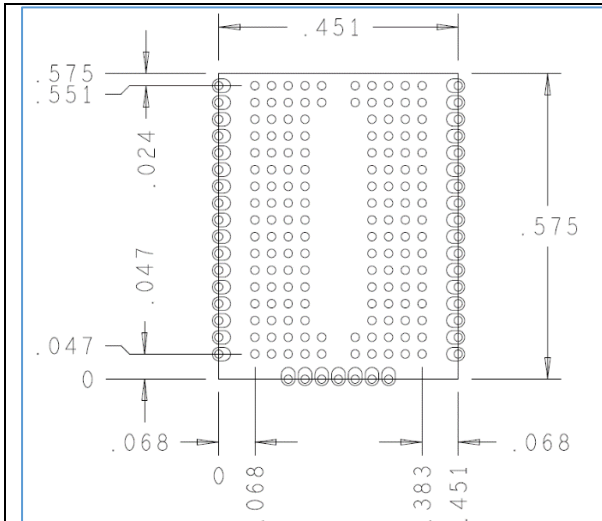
DDR4 144 Pin EdgeProbe(TM) Address Mechanical
